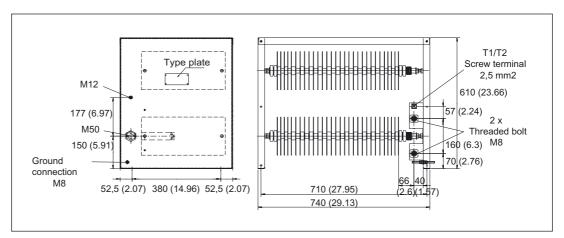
Dimension drawing, 25 kW/125 kW resistor
